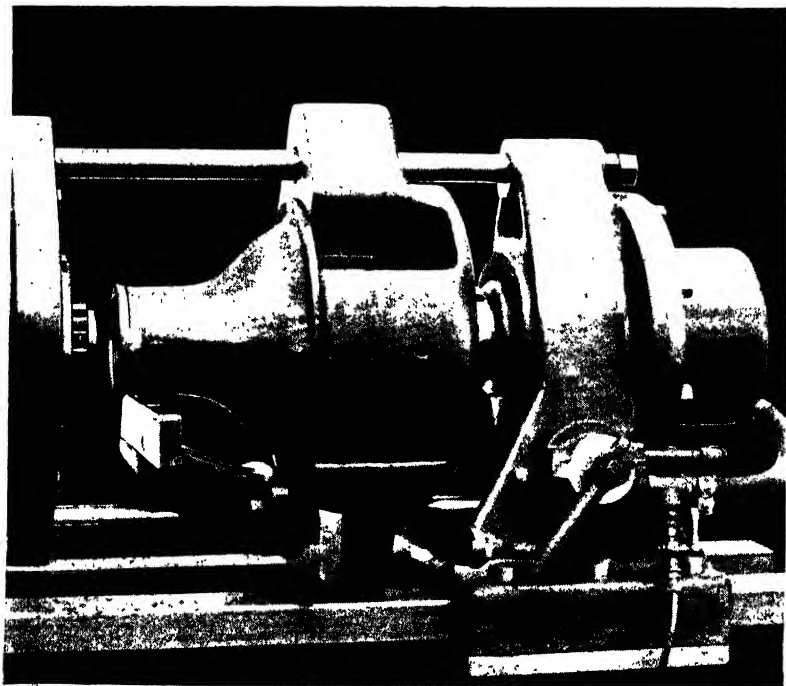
Milling Thread in the Propeller-shaft Bore of Differential Carrier
